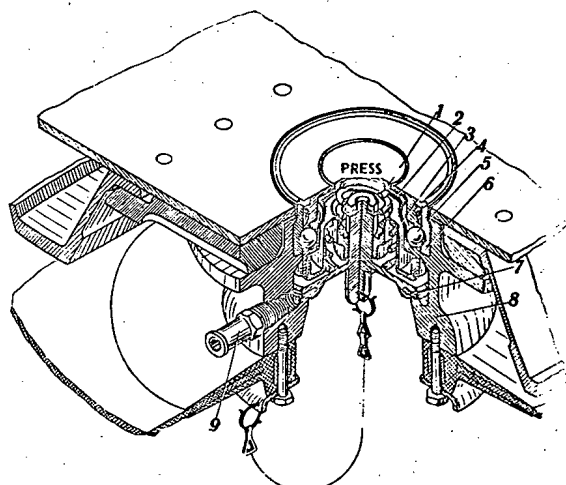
FILLER WITH QUICK-RELEASE PLUG
